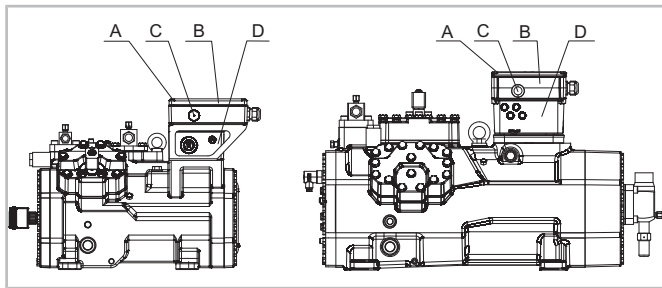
4- and 6-cylinder compressors with CM-RC-01 compressor module.
